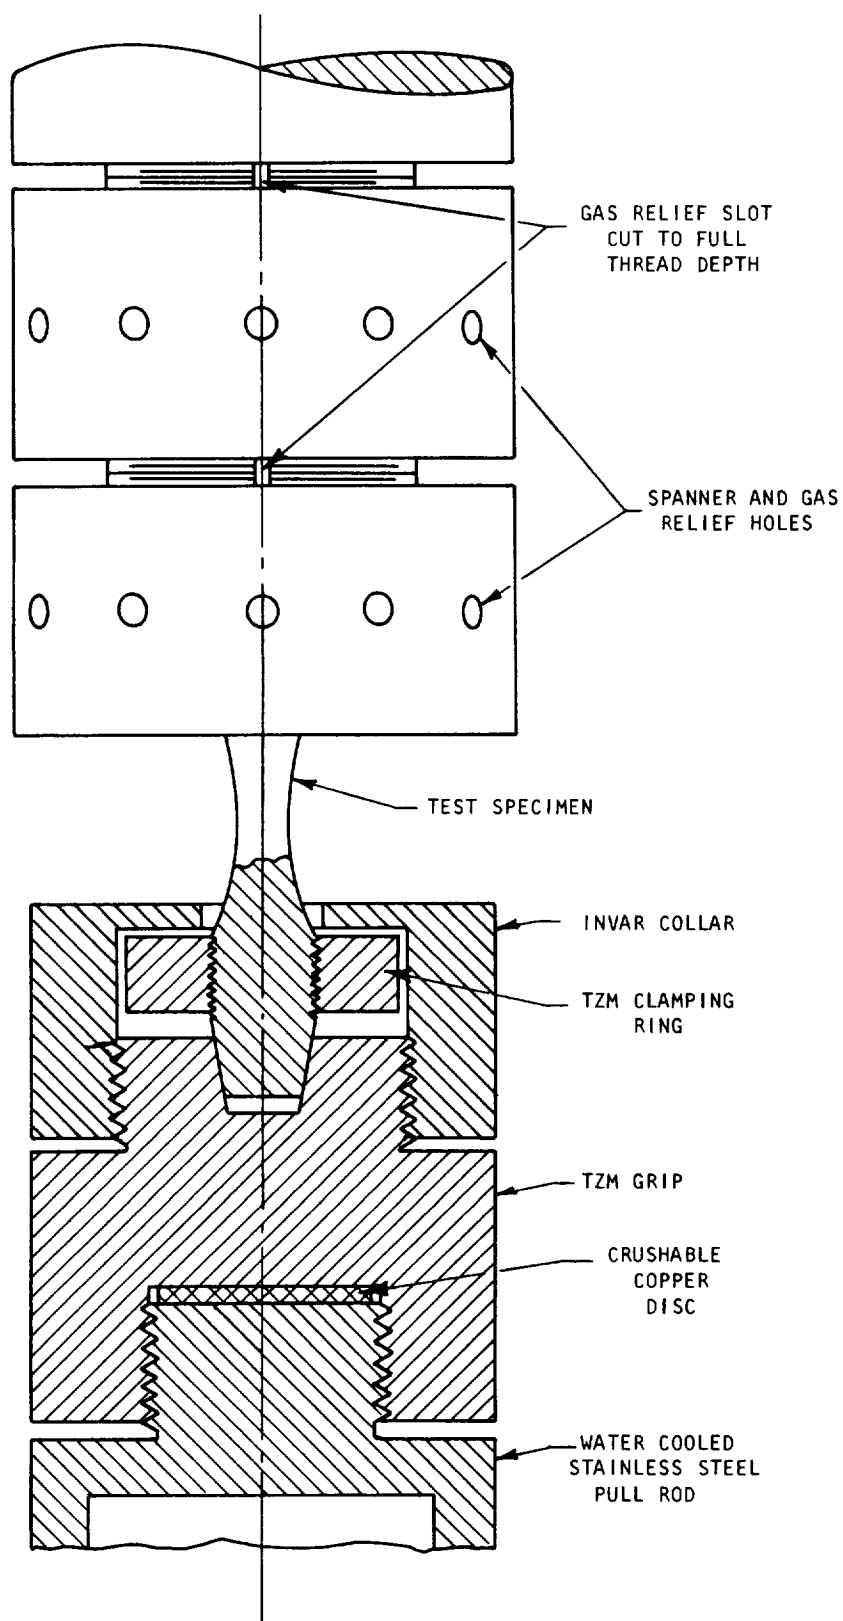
Low cycle thermal fatigue test specimen and grip assembly.
